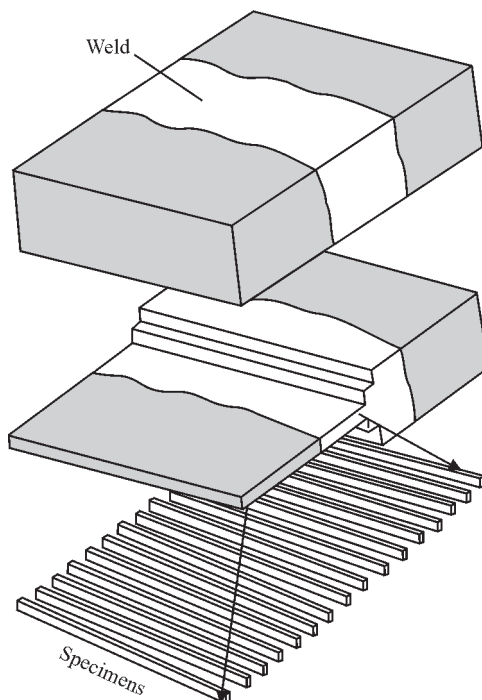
Scheme of manufacture of specimens from welded joint
